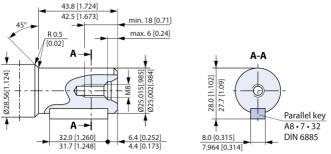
OMP shaft version: Cylindrical shaft 25 mm; Parallel key DIN 6885
